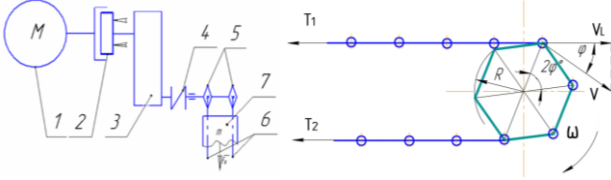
Circuit conveyor drive scheme: 1 - engine; 2 - clutch; 3 - reducer; 4 - safety clutch; 5 - sprockets with a drive shaft; 6 - traction chains; 7 - conveyor belt.
